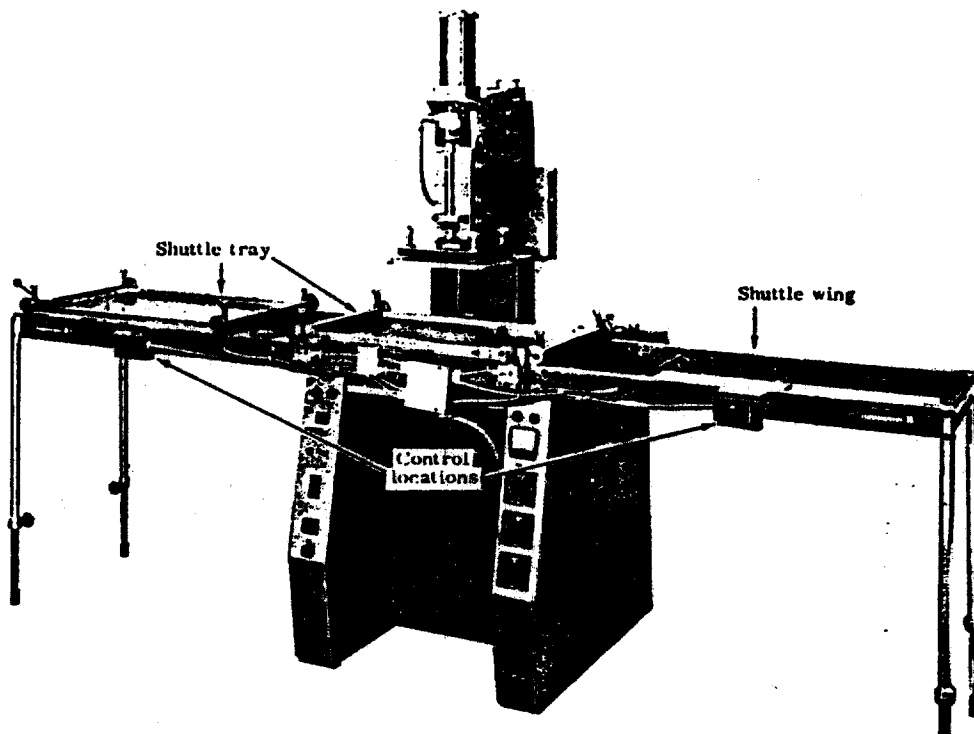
Thermatron shuttle tray sealer without rf shielding.
